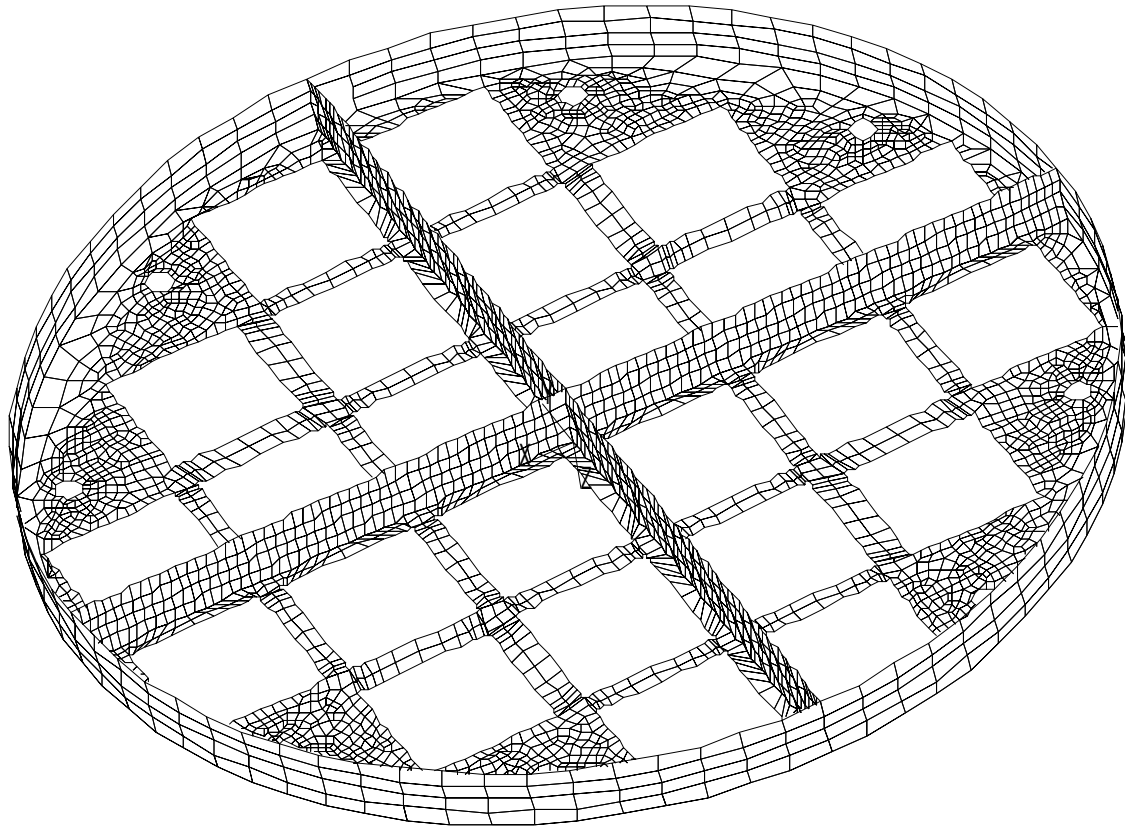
PWR Bottom Weldment Plate Finite Element Model
